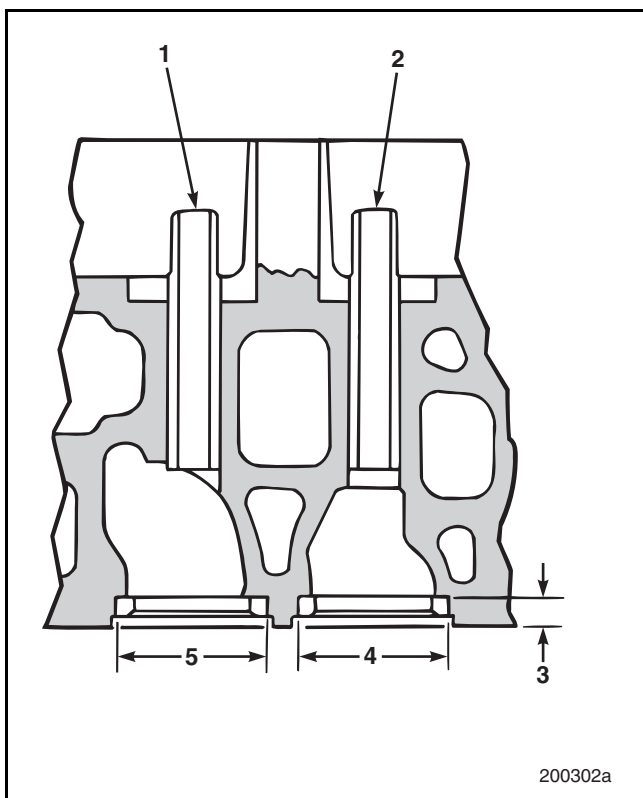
Valve Seat Insert Counterbore Dimensions
